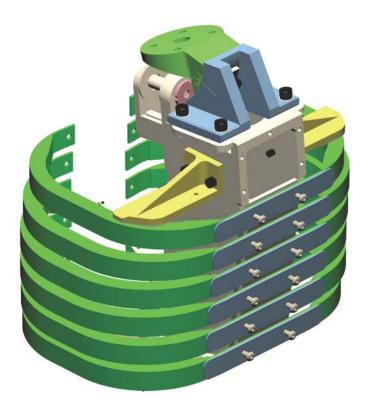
Detaching the ribs and rear rib supports
